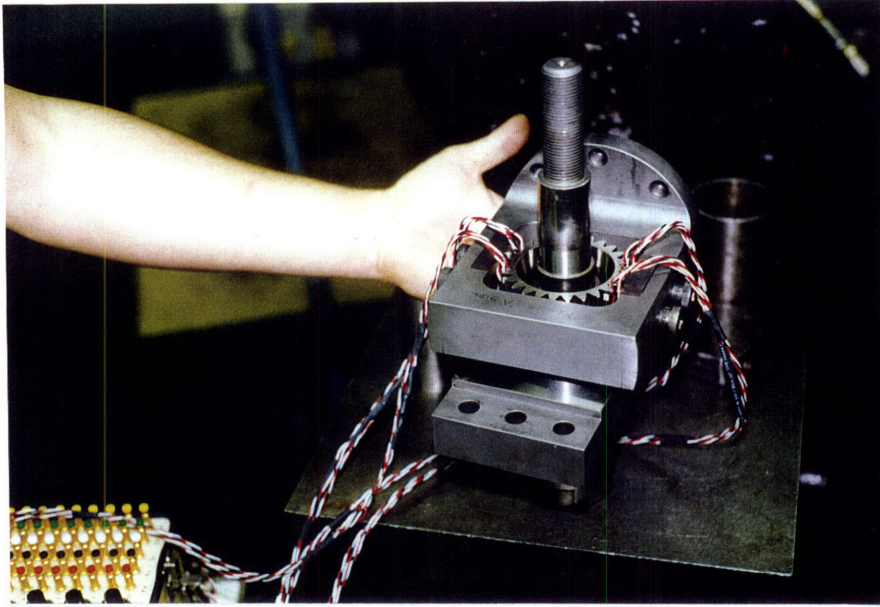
The square bracket and V-blocks (see Fig. 5.14 for CAD drawing of final test design).
